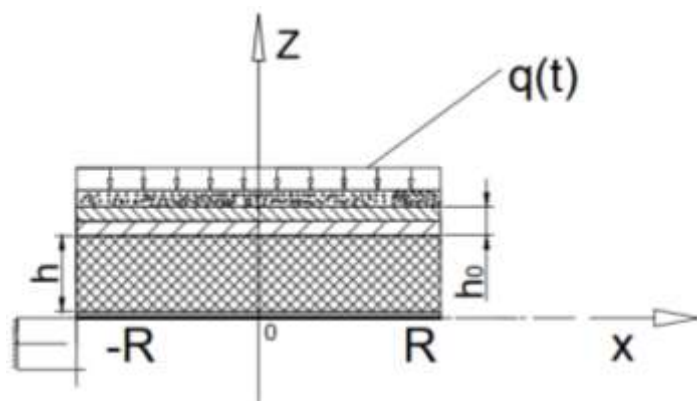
A sectional view of a feeding cylinder with elastic casings
